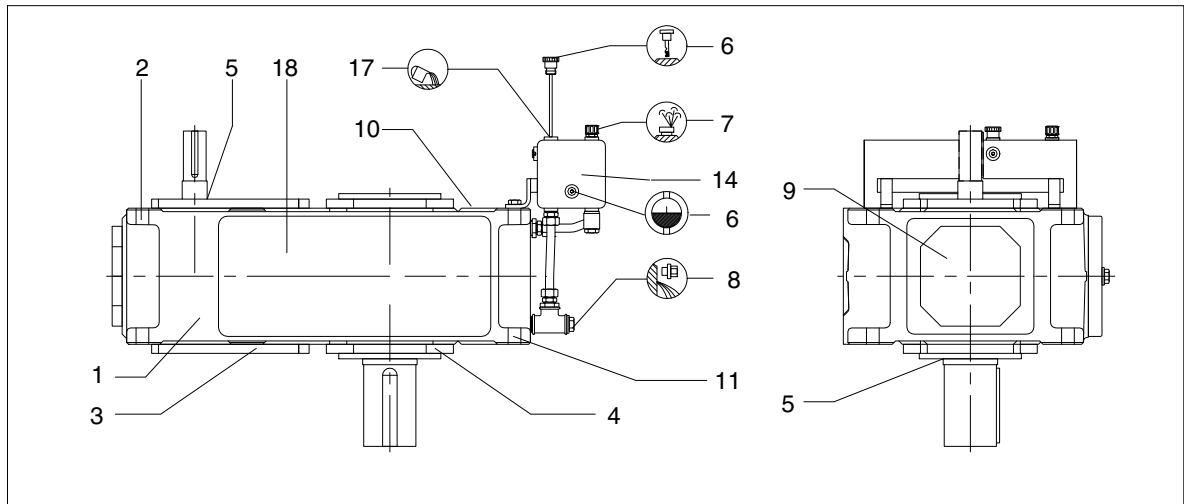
Gear-unit features on gear units type H..V with oil-equalising tank
